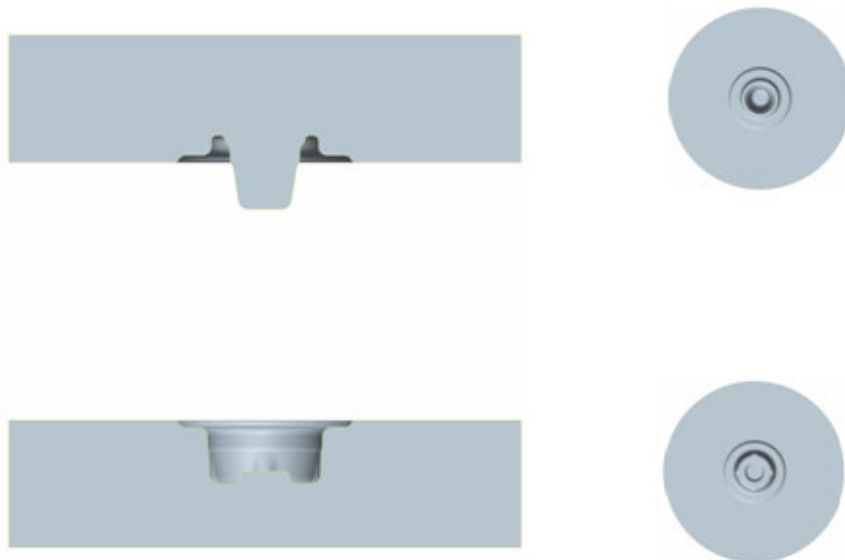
Views of 3-D Model of Finish Die Assembly
